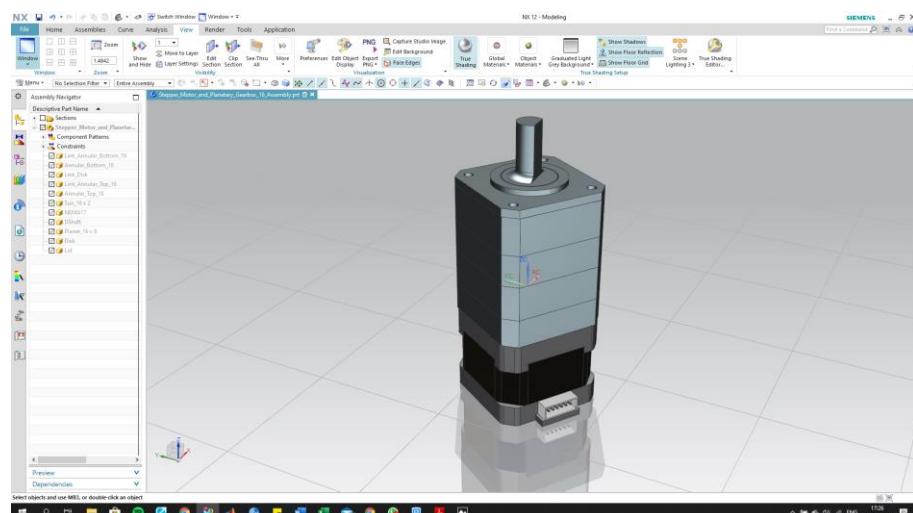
Final Stacked 1:16 Planetary Gearbox made to Fit a NEMA 17 Stepper Motor
